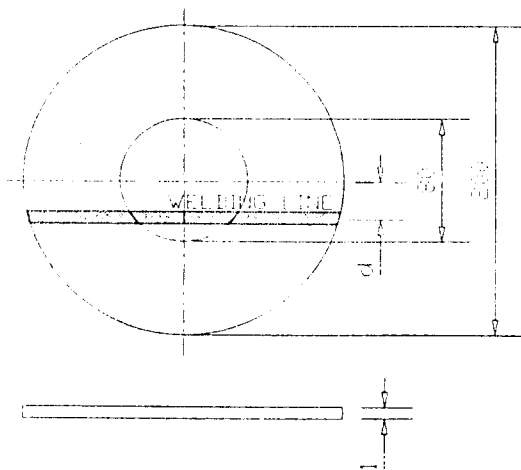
Configuration of deep drawing specimen and position of weld line
